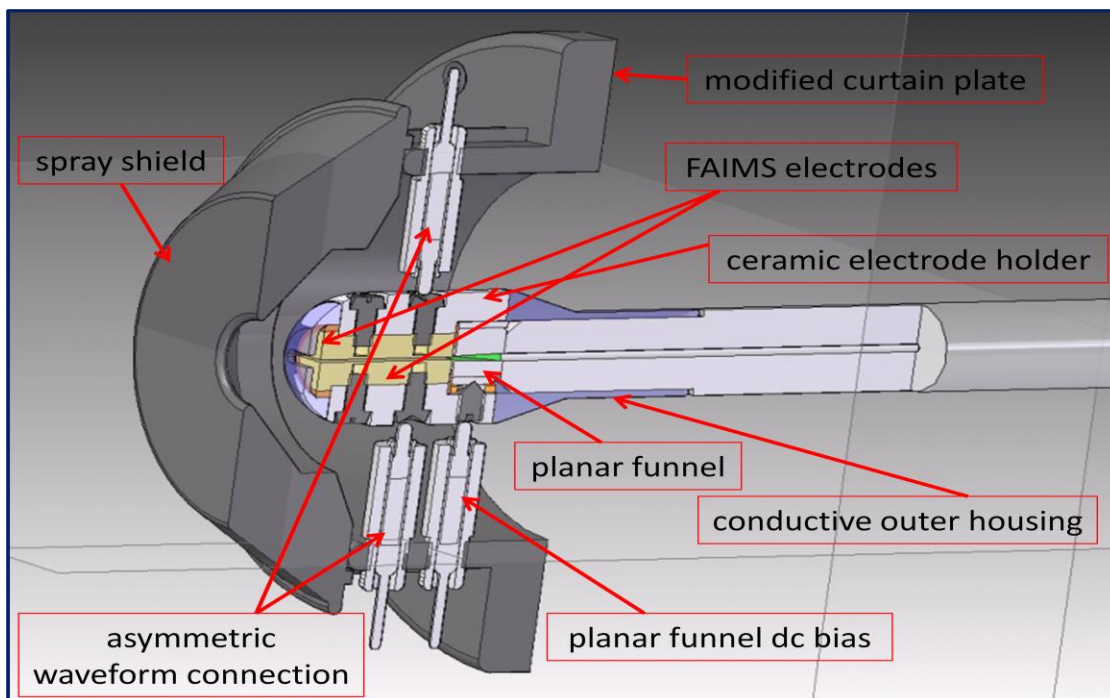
side on cutaway drawing of G4.1 with major components labeled. Dimensionally identical to the G4.0, the 4.1 has the addition of a planar funnel dc bias and machined ceramic holders for improved alignment of the FAIMS electrodes.
